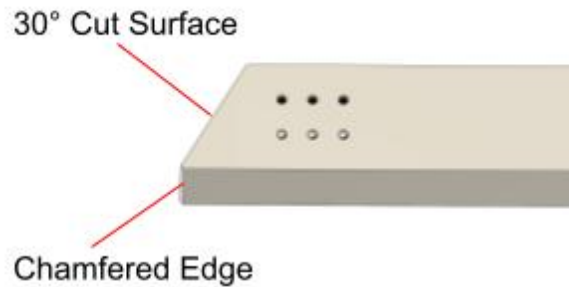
Chamfered Edge of Cut Surface on Rear Arm
